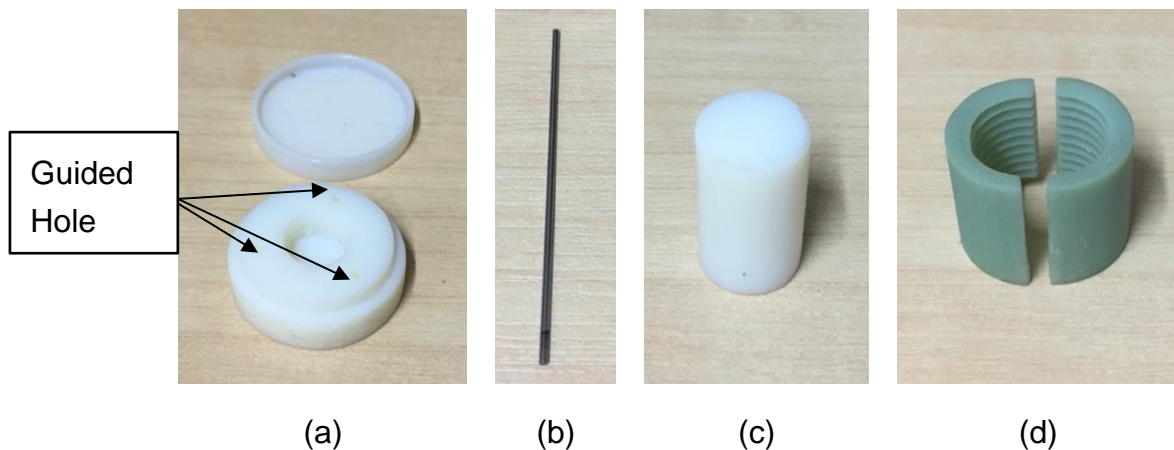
Components of the mould for the fabrication of the bellows-like structure. (a) Top and bottom cap. (b) Stainless steel pin. (c) Cylinder for creating space for the spherical joint. (d) Two half cylindrical moulds.
